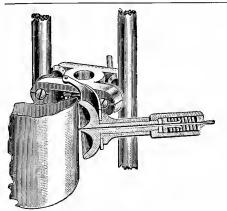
Pencil Holder for Boyer Speed Recorder. Chicago Pneumatic Tool Company.
